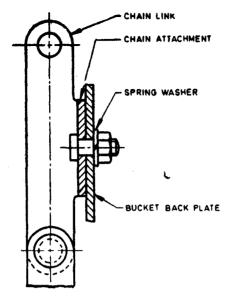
Fixing of Bucket to Chain Passing Through Back of Bucket
